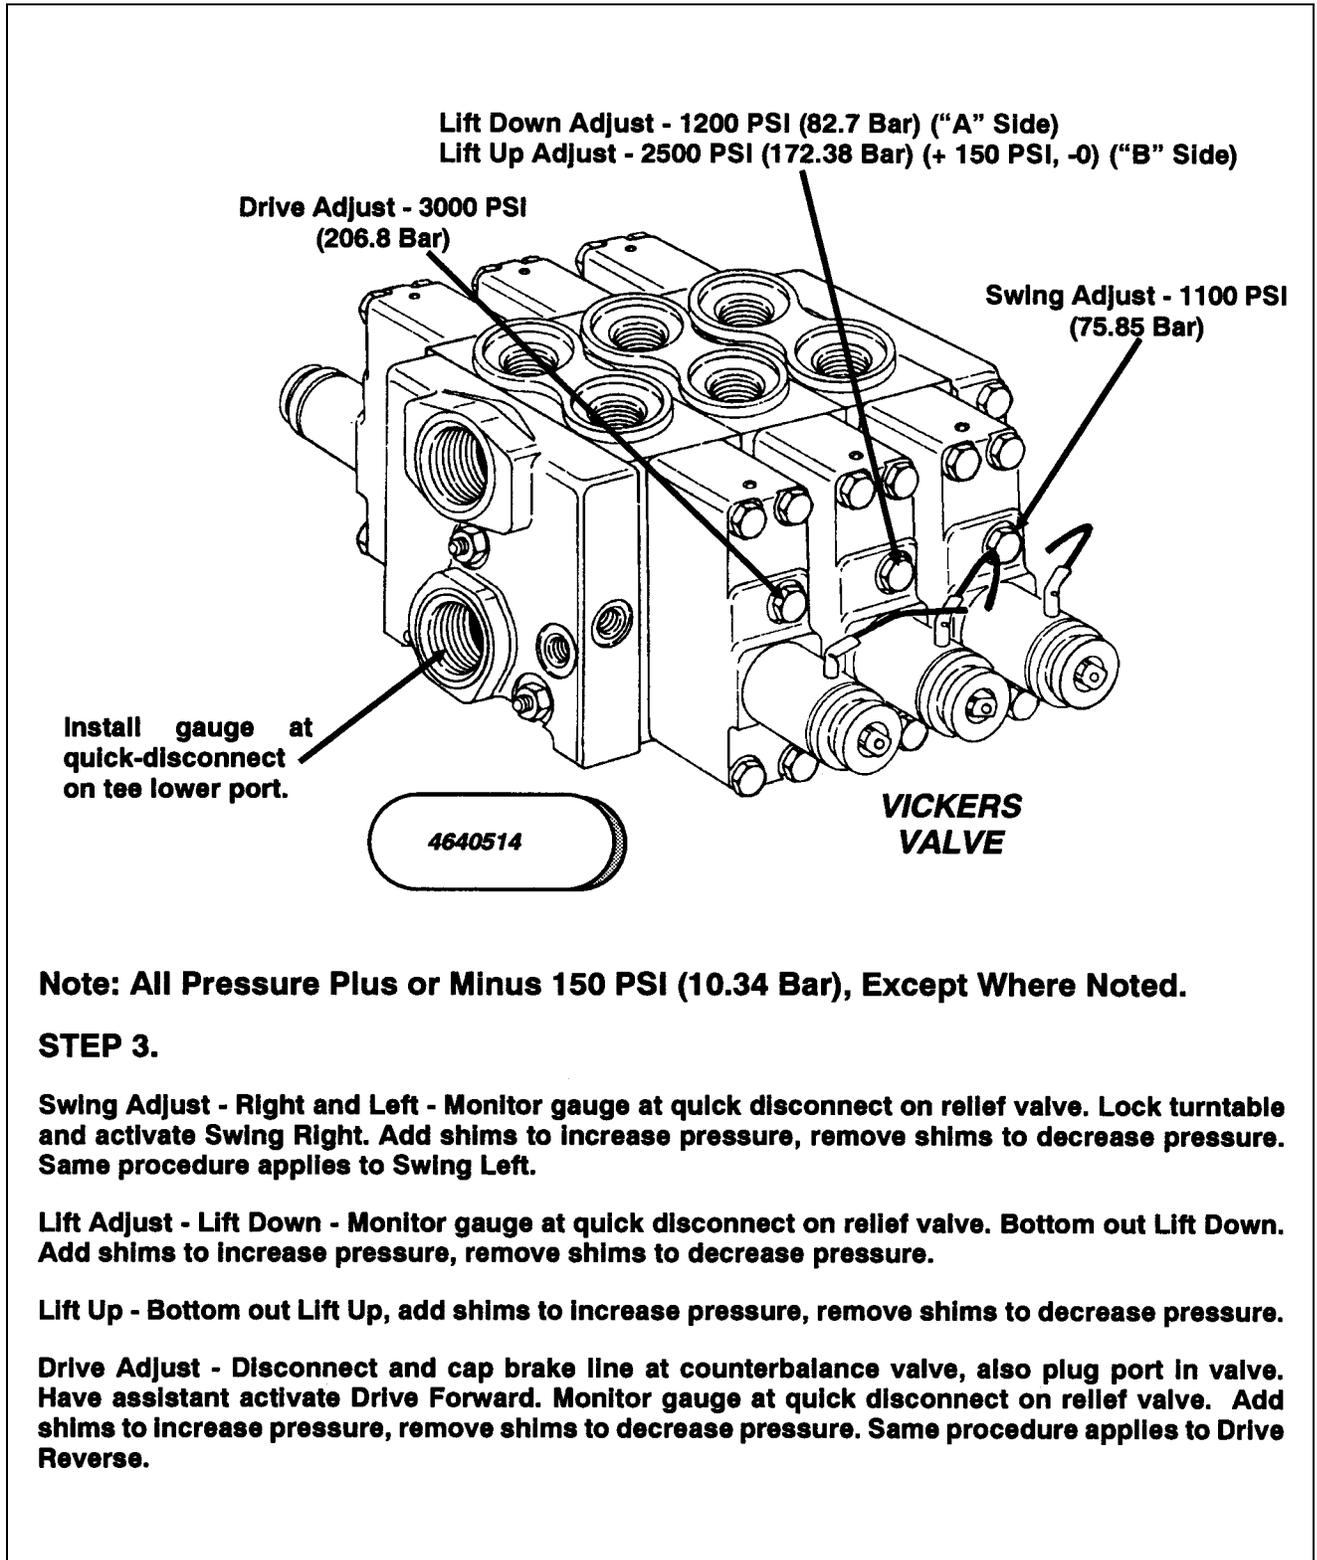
Vickers Proportional Valve Pressure Setting, Machines Built Prior To 1989 With Accessory Valve. (Sheet 3 Of 4)
